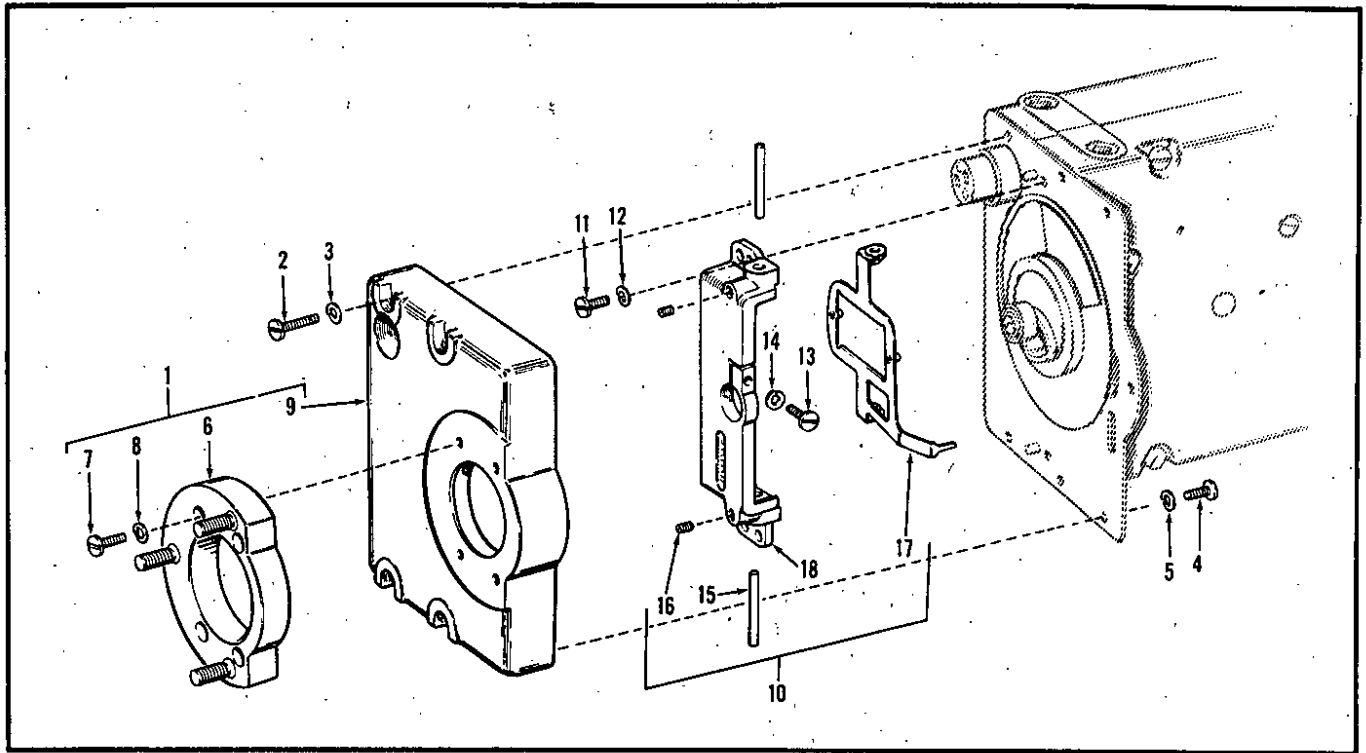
(Sheet 1 of 4) Exploded View of Motion Picture Camera
